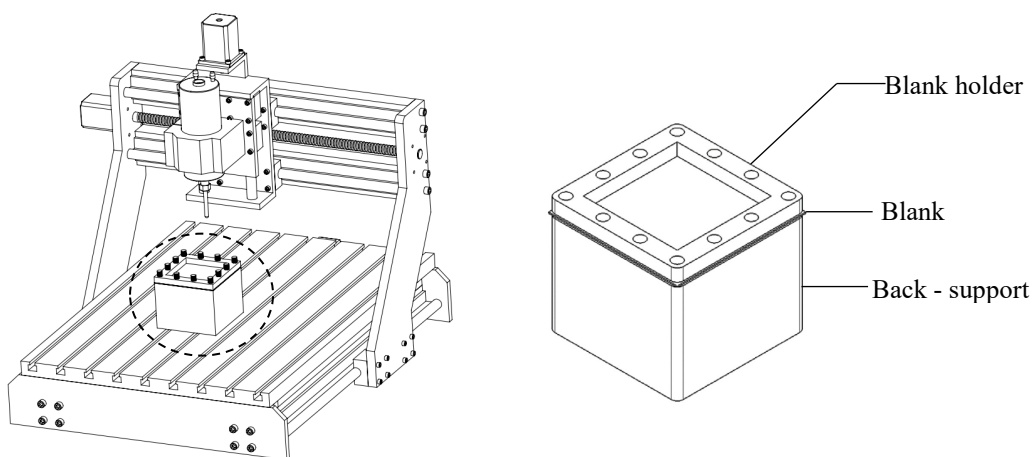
Fixture for sheet metal camping mounting on CNC Machine.
